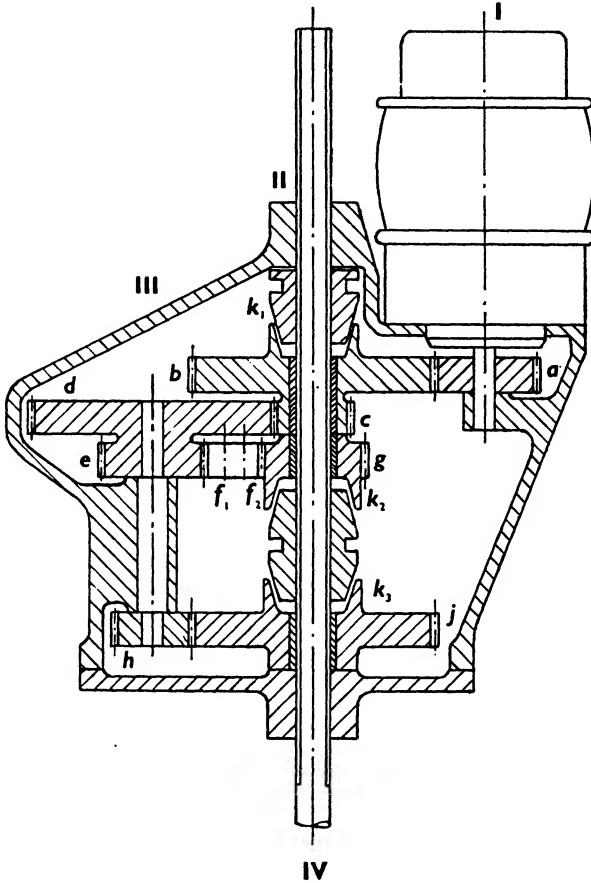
A. GEAR-BOX FOR DRILLING MACHINE
